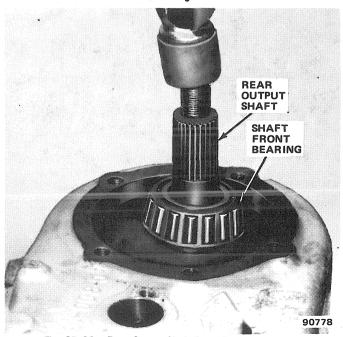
D-80 Rear Output Shaft Front Bearing Removal
